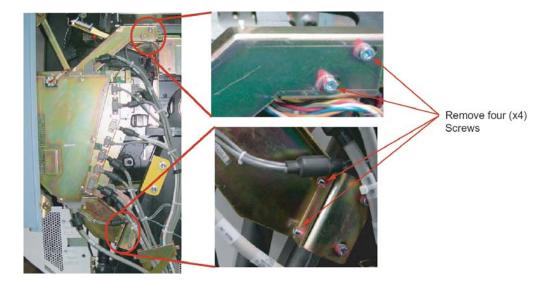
TGPU/TGPG Assembly On The Gantry Frame
